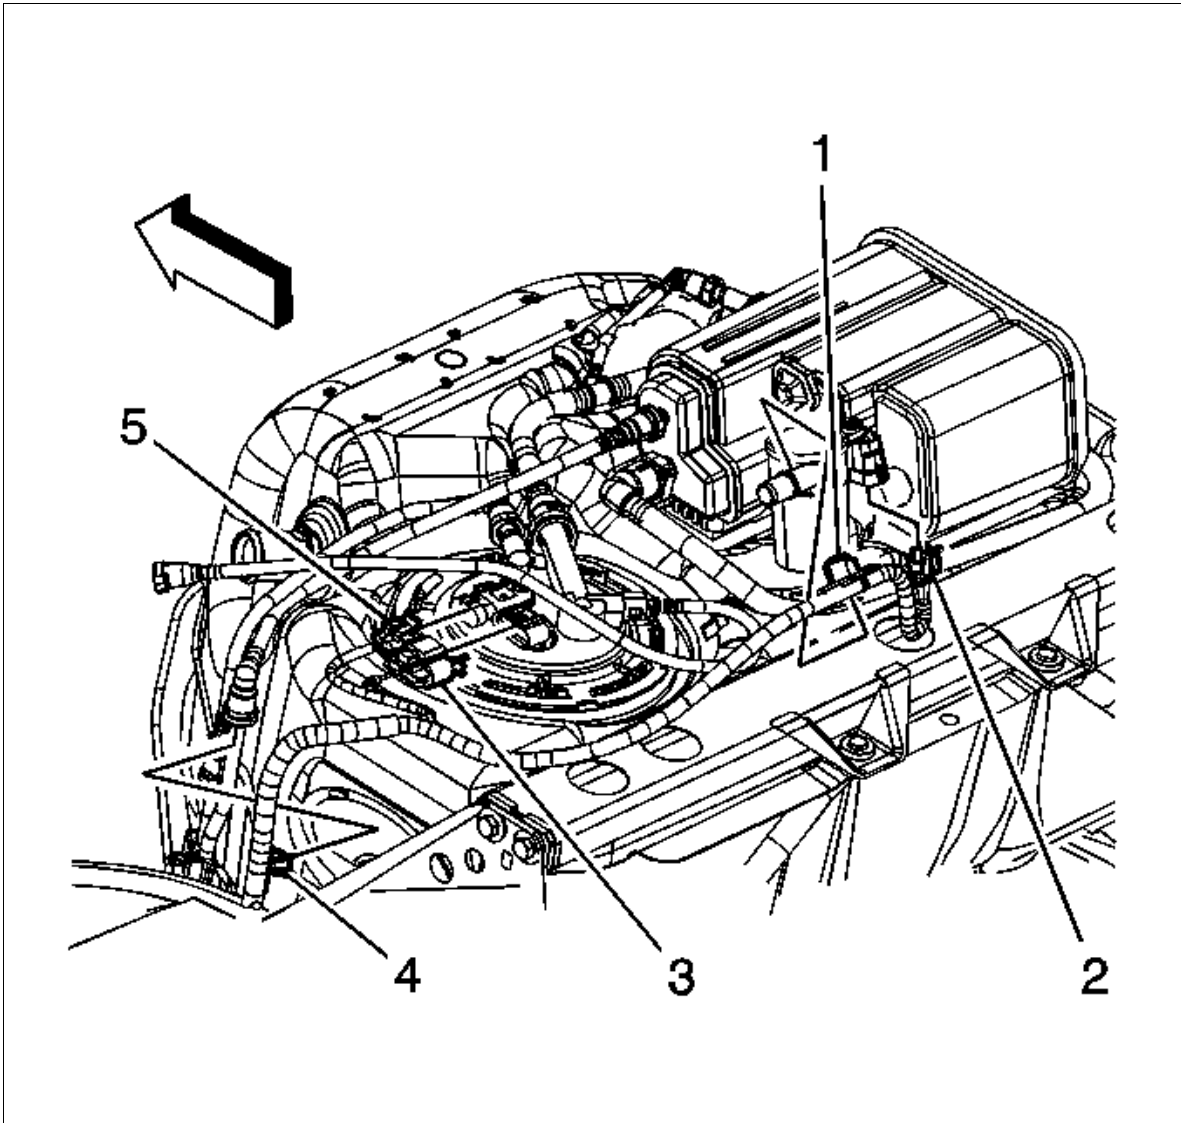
Fuel Feed Pipe Quick Connect Fitting
